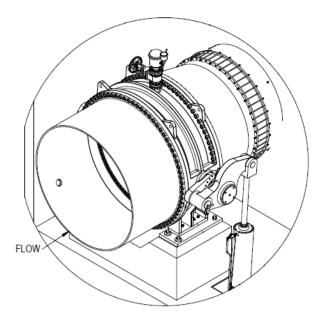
Isometric view of a flanged horizontal butterfly valve with exposed linkage hydraulic operator and scroll case extension slip-joint (right)
